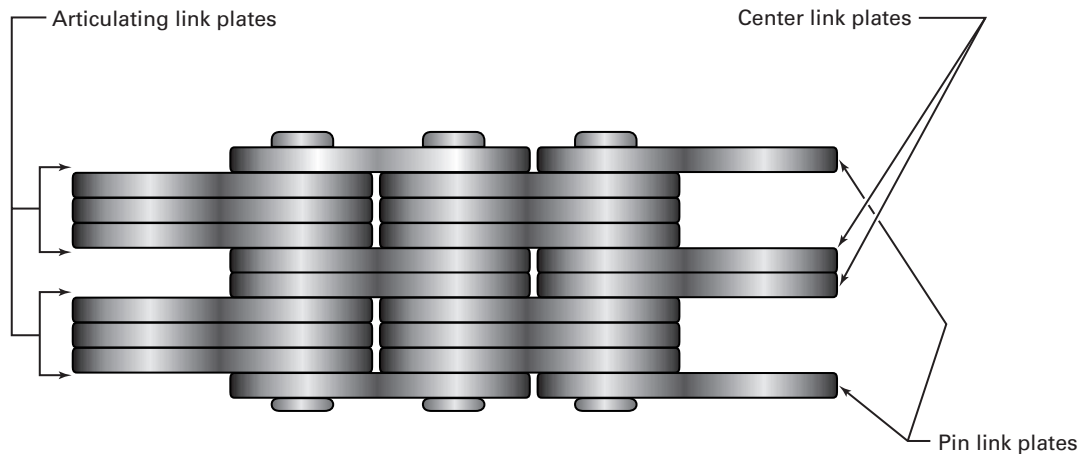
ASSEMBLY SHOWING 4 × 6 LACING AND PARTS
